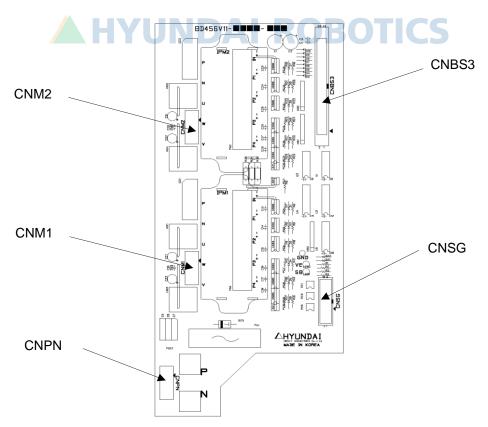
Parts Configuration of HDAD2 Drive Unit
